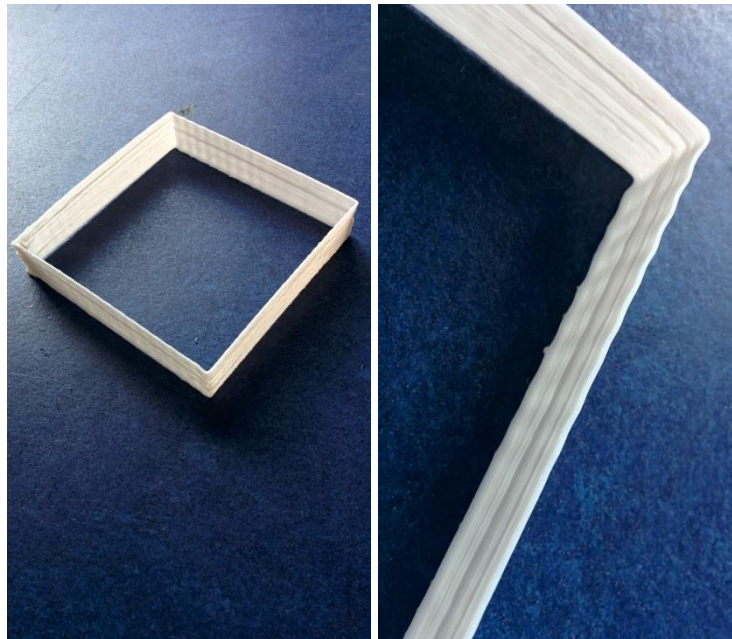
and 4. First and second extruded pieces showing their numerous flaws: corner design, excessive layer height, faulty base placement, and incorrect finish (focus on layering and uneven height due to excessive increment in layer height)
